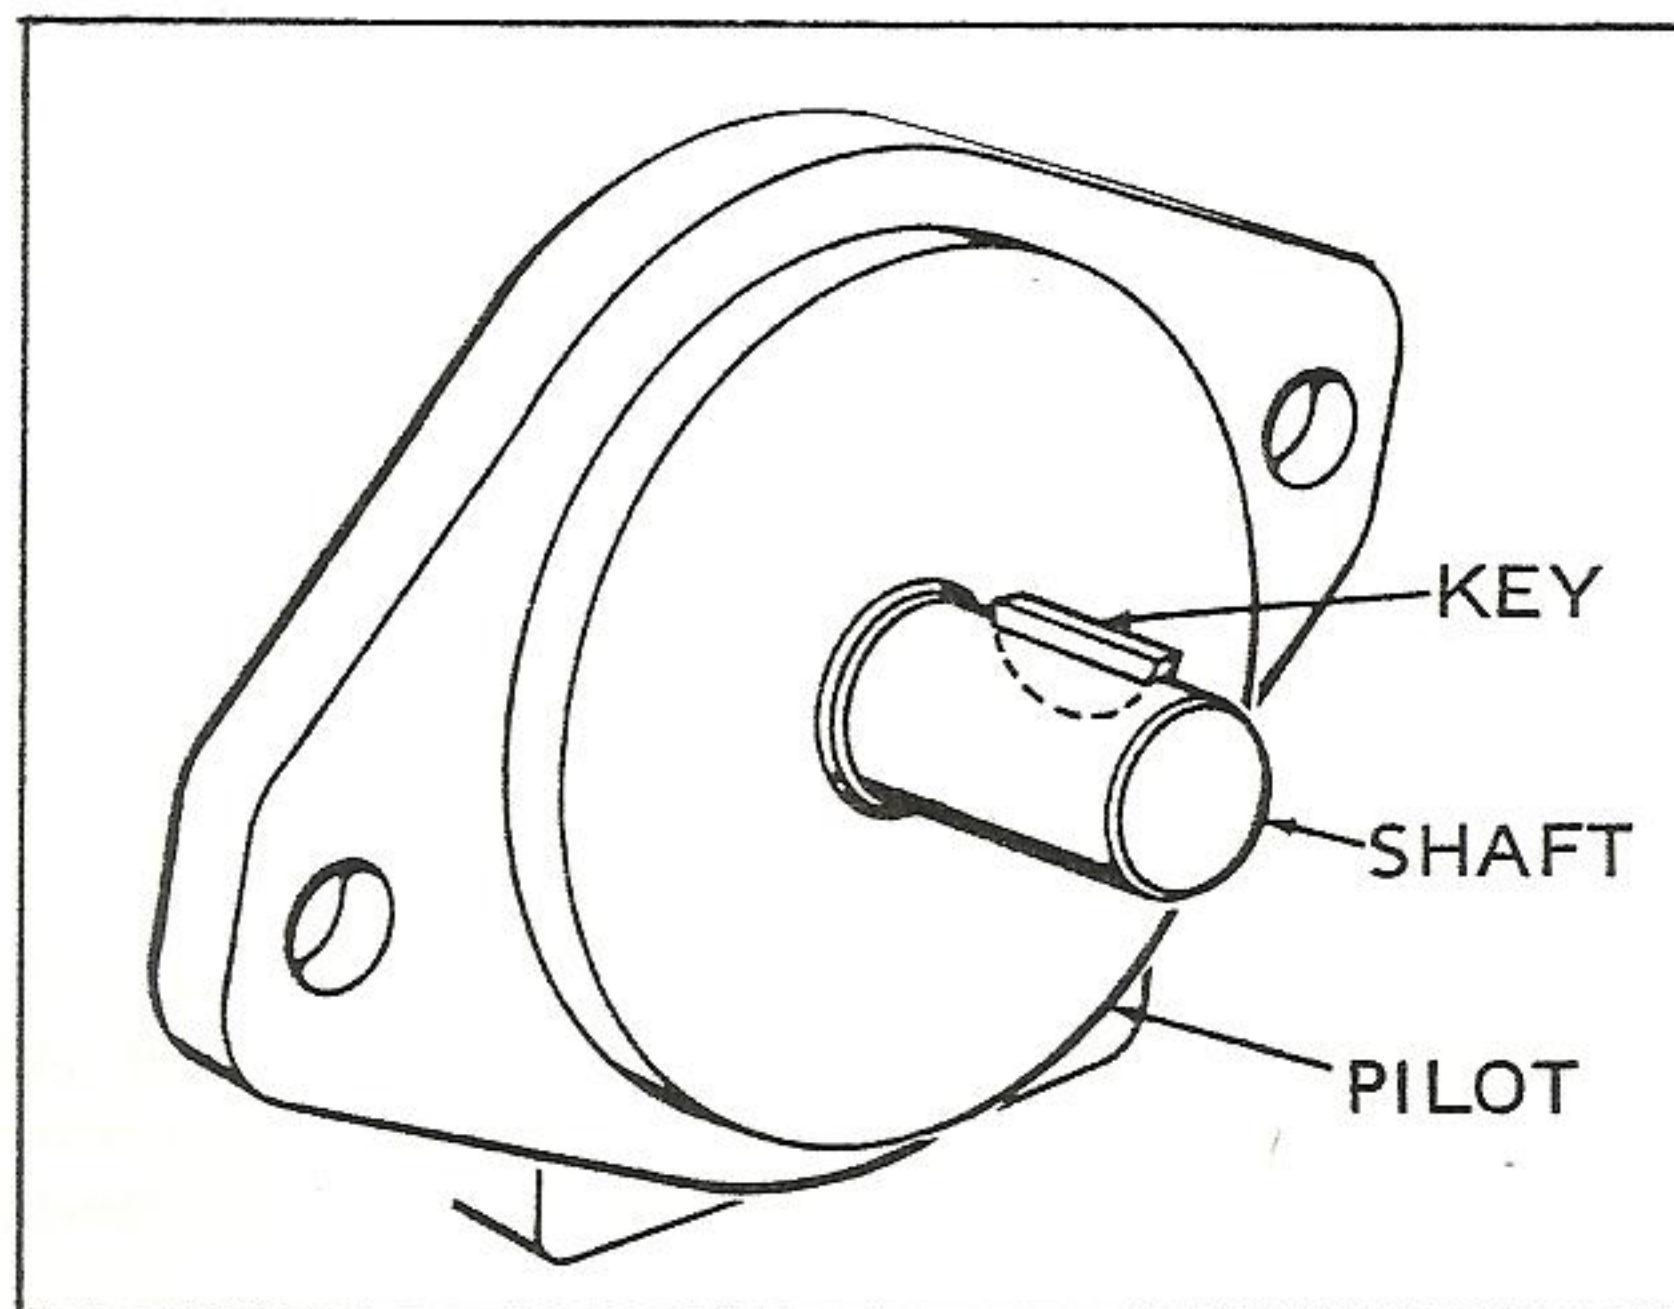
15. PUMP MOUNTING FLANGE
